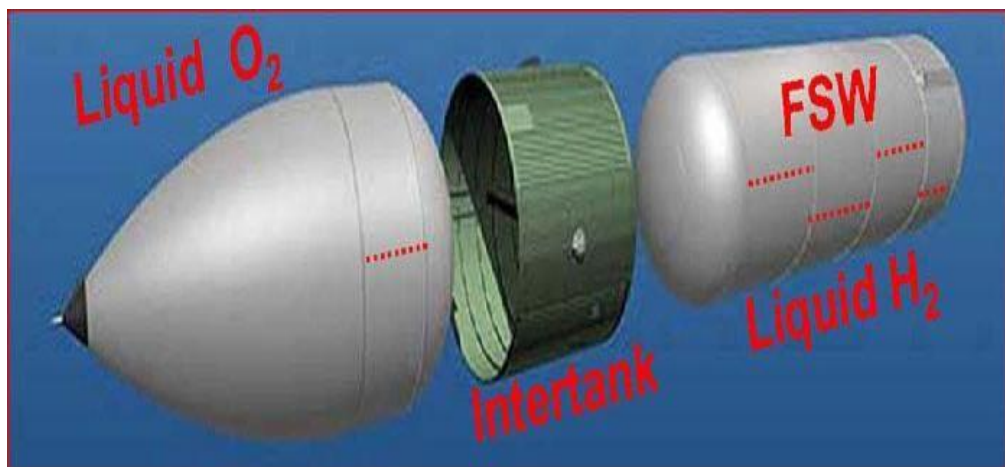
Rocket fuel tanks fabricated by FSW (Rowe and Thomas, 2006)
